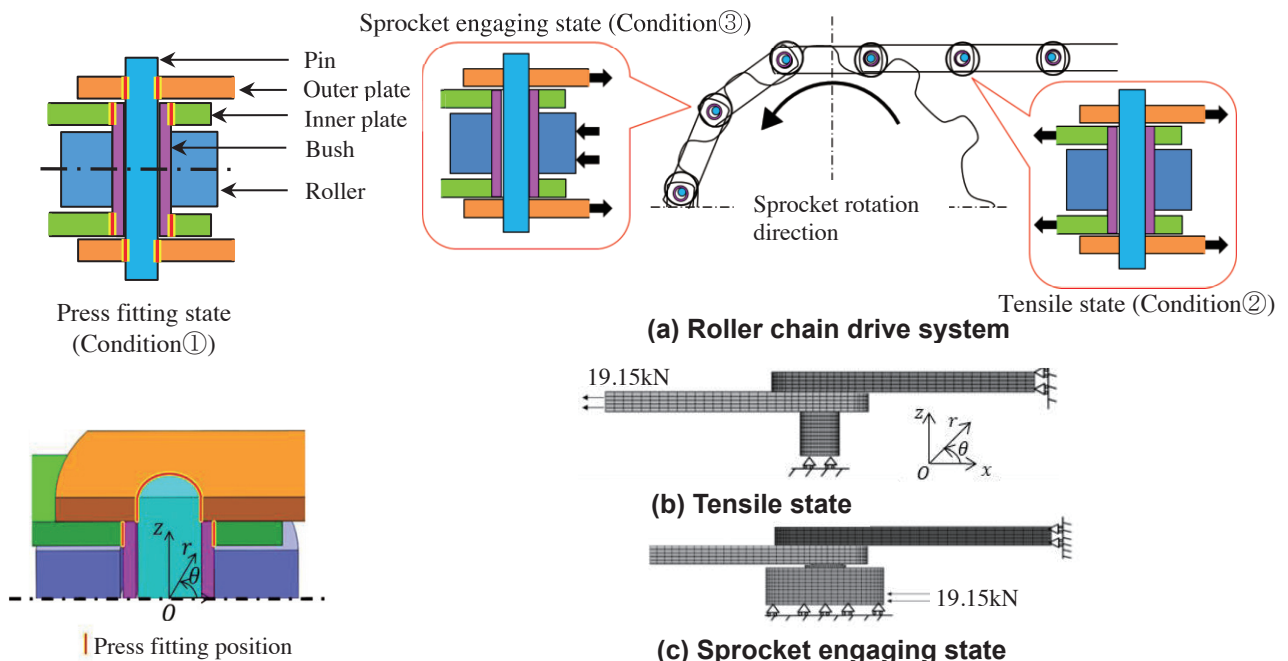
Schematic view of the roller chain drive system, here pin are press fitted by outer plate, bush are press fitted by inner plate
